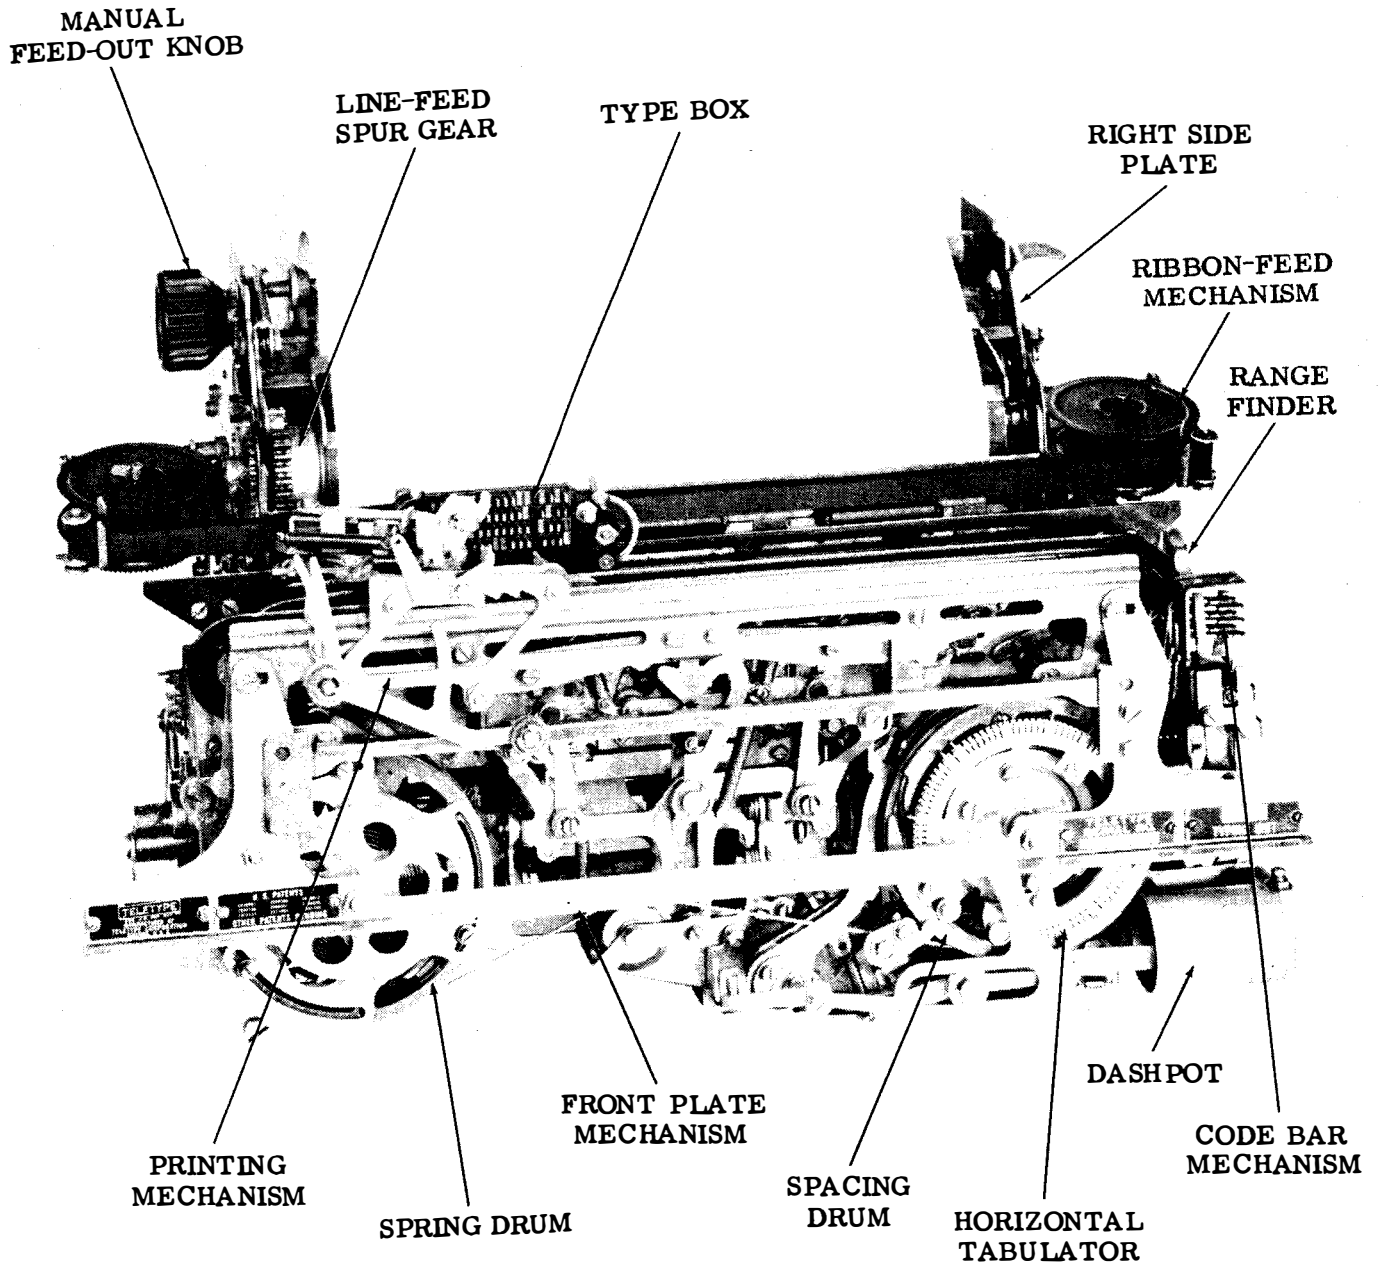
Typing Unit Model 28 (Friction Feed), Front View
